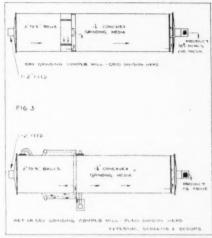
Compeb mill developed in 1915, and combined primary and finish grinding operations in a single milling unit. Mill feed was 1-in. to 2-in. size and product was 78 to 85 per cent minus 200-mesh up to about 1920. After 1920, the Compeb mill was adapted for wet grinding by adding external peripheral screens and scoop pipes
